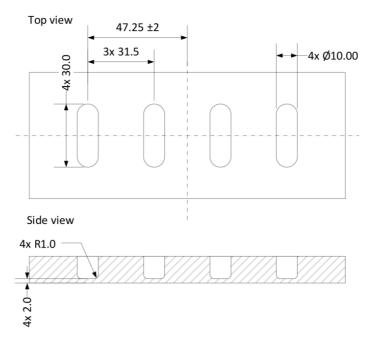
Dimensions and location of the weld grooves on the plates
